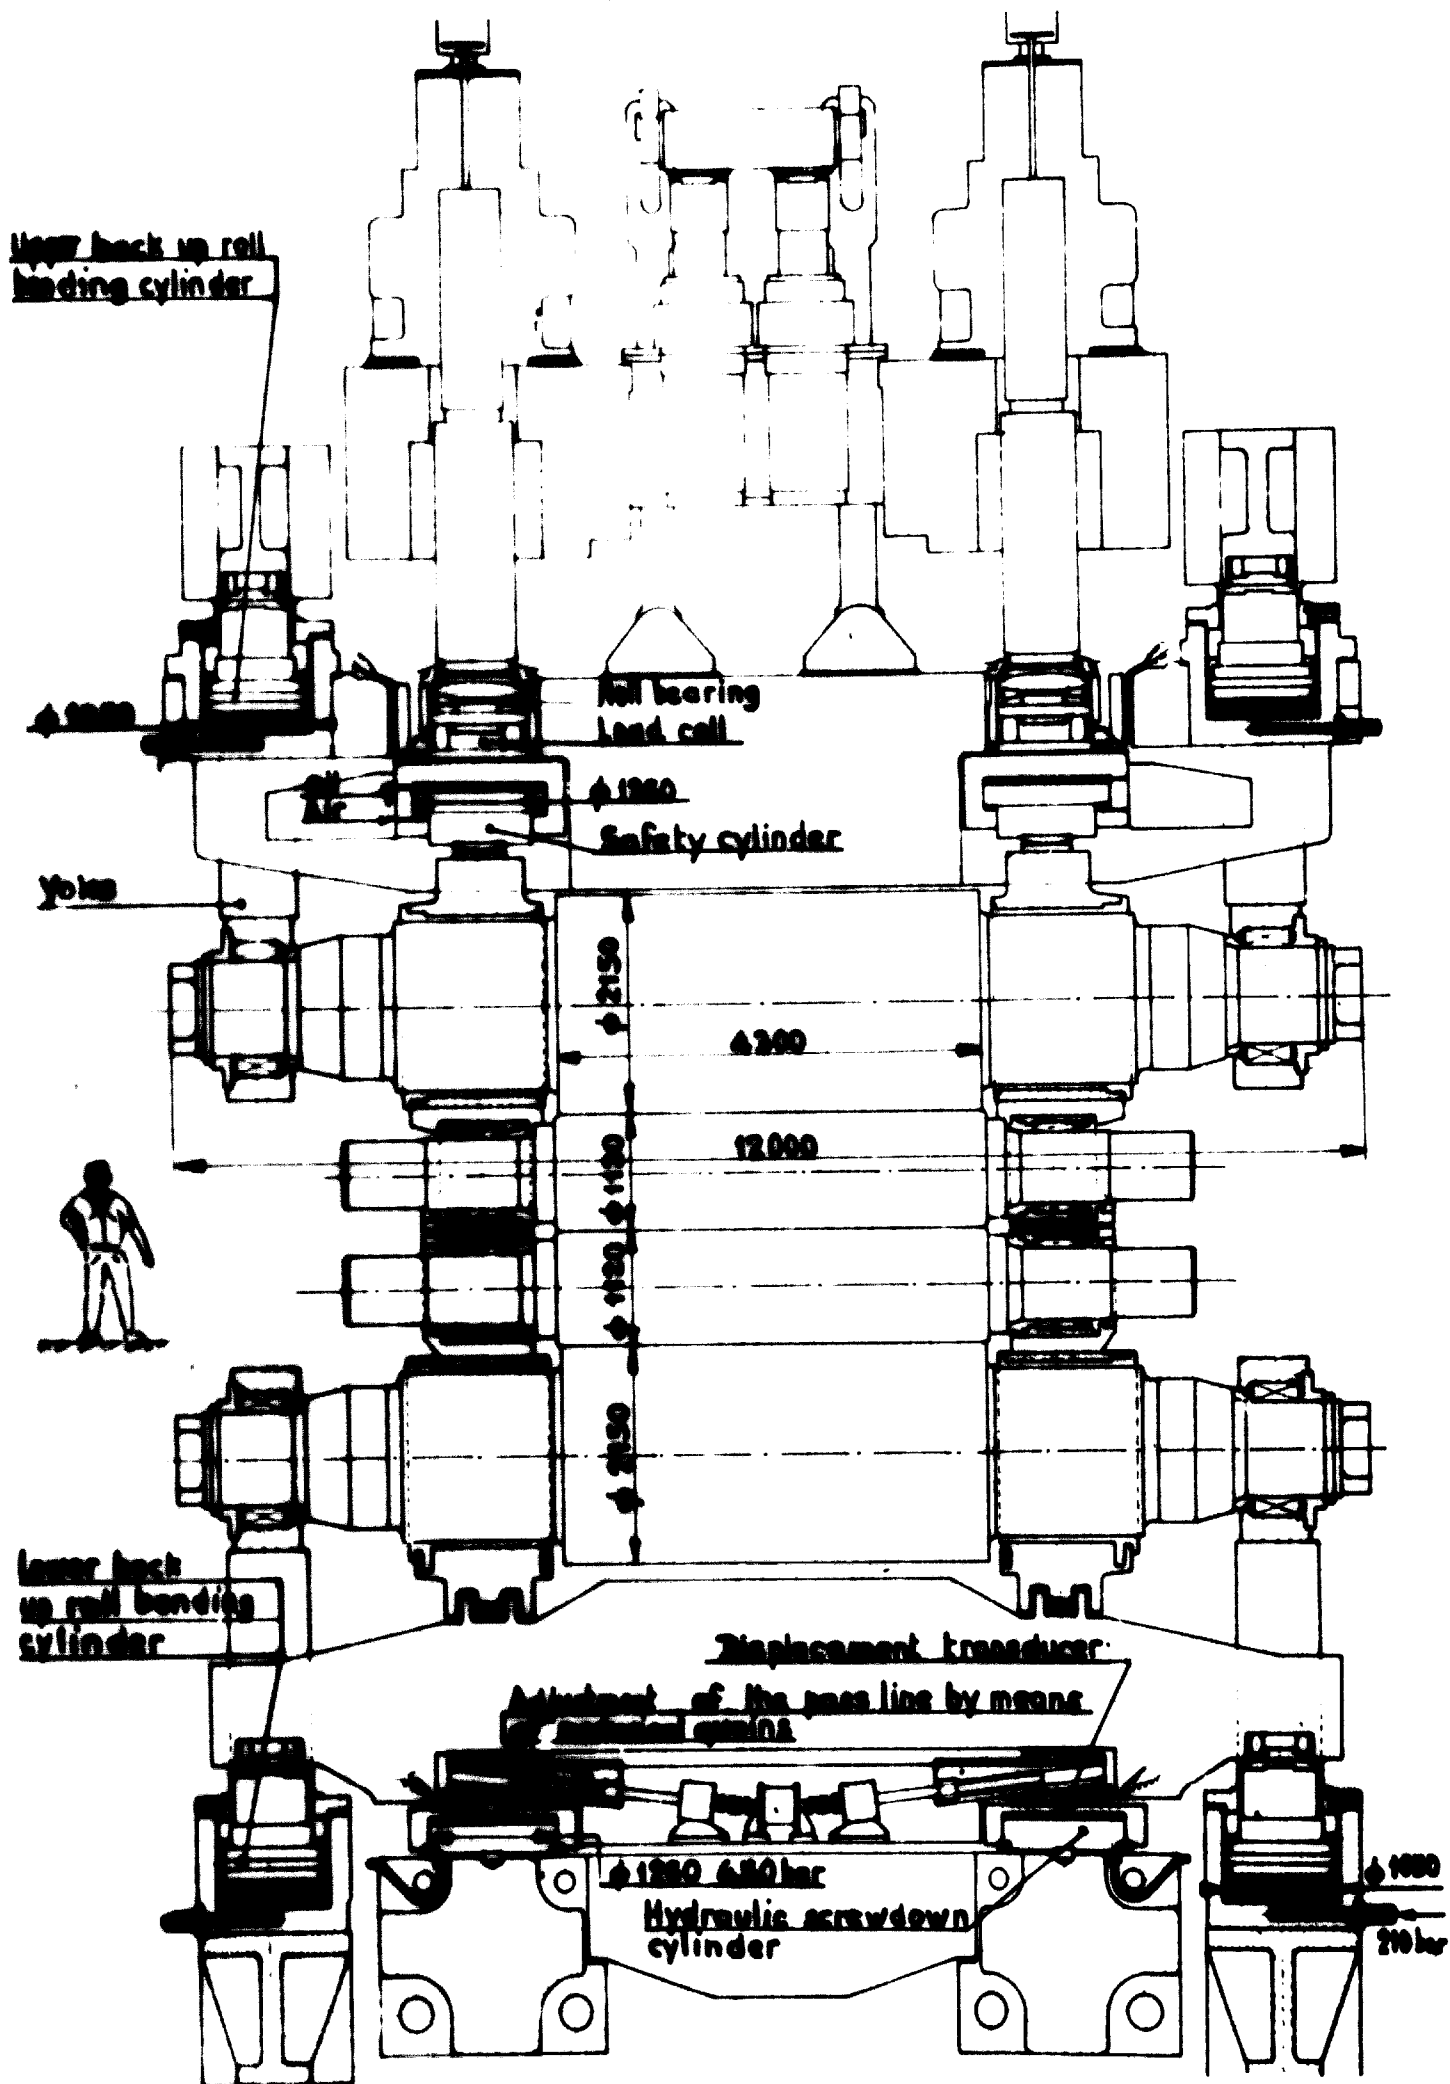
Cross-sectional arrangement of 4,000 mm plate mill
